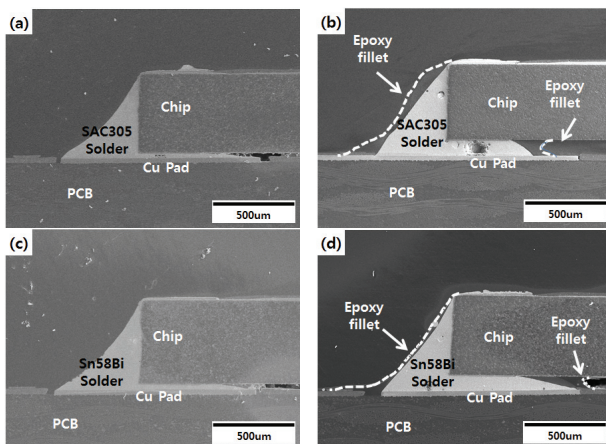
Cross-section images of primary specimens (a) SAC305 solder joint, (b) epoxy SAC305 solder joint, (c) Sn58Bi solder joint, and (d) epoxy Sn58Bi solder joint.
